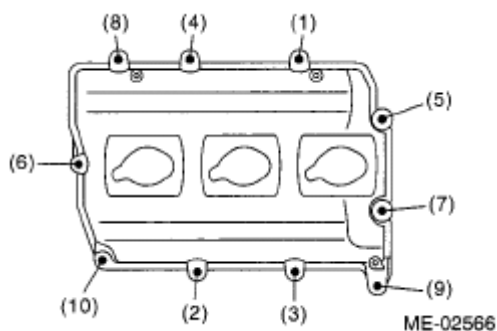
Tightening Sequence Of Rocker Cover Bolts For RH Side
